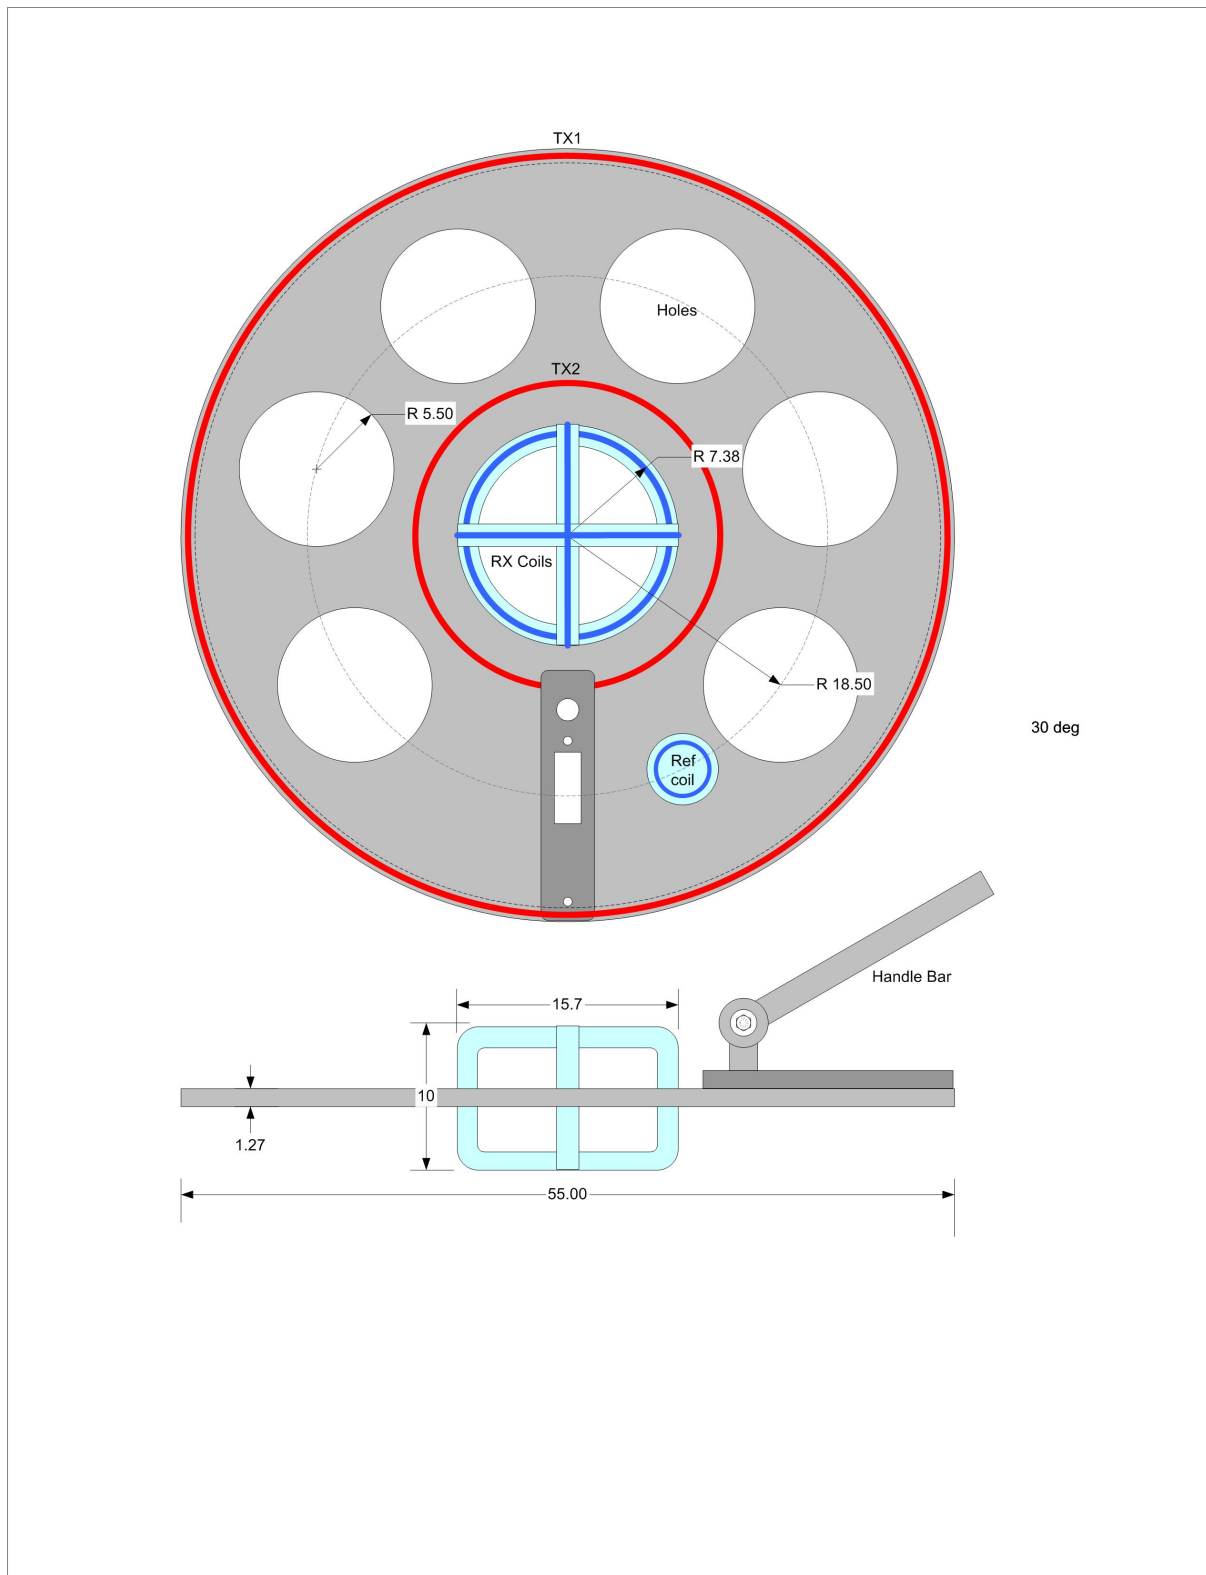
GEM-3 \mathcal{D}^+ preliminary drawing 4. Final design for receiver coils is shown in Fig. 3.2.6.
